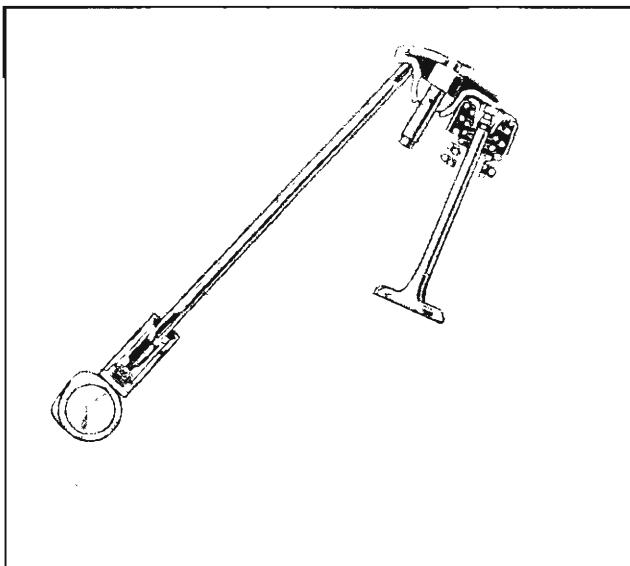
Fixed Setting Rocker Arm Valve Train
